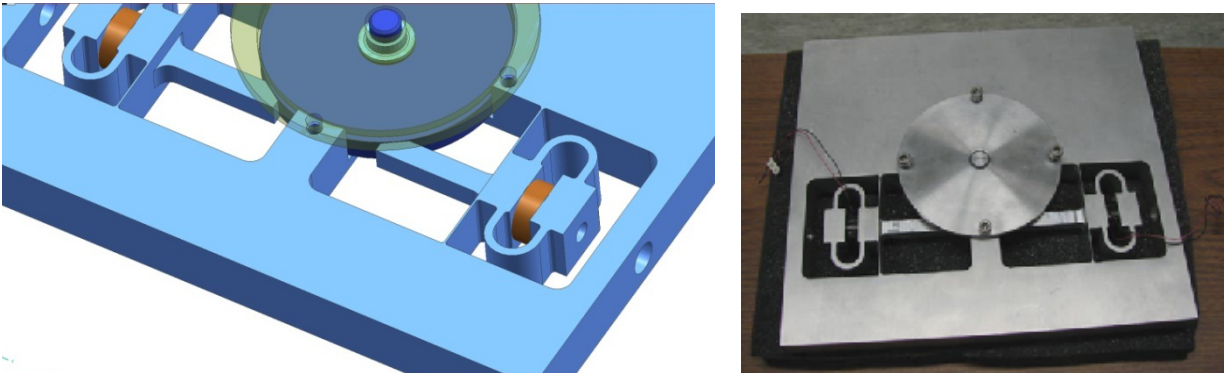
A CAD model of a prototype rotary motor that can drive a rotor clockwise and counter clockwise along with a photograph of finished motor. The preload on the rotor for each of the horns can be relieved by a bolt connected through the frame to the backing.
